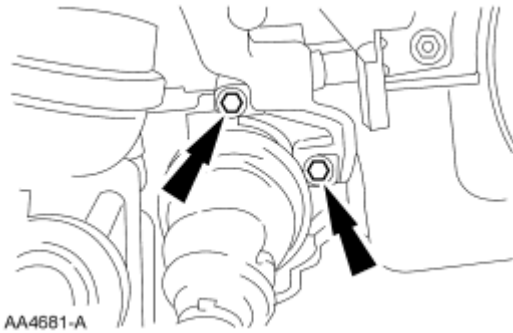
Engine Mount Bracket-To-Transaxle Bolts
